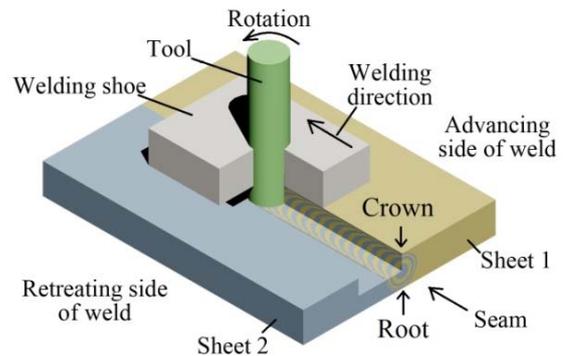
Scheme of the principle of friction stir welding for polymers.
